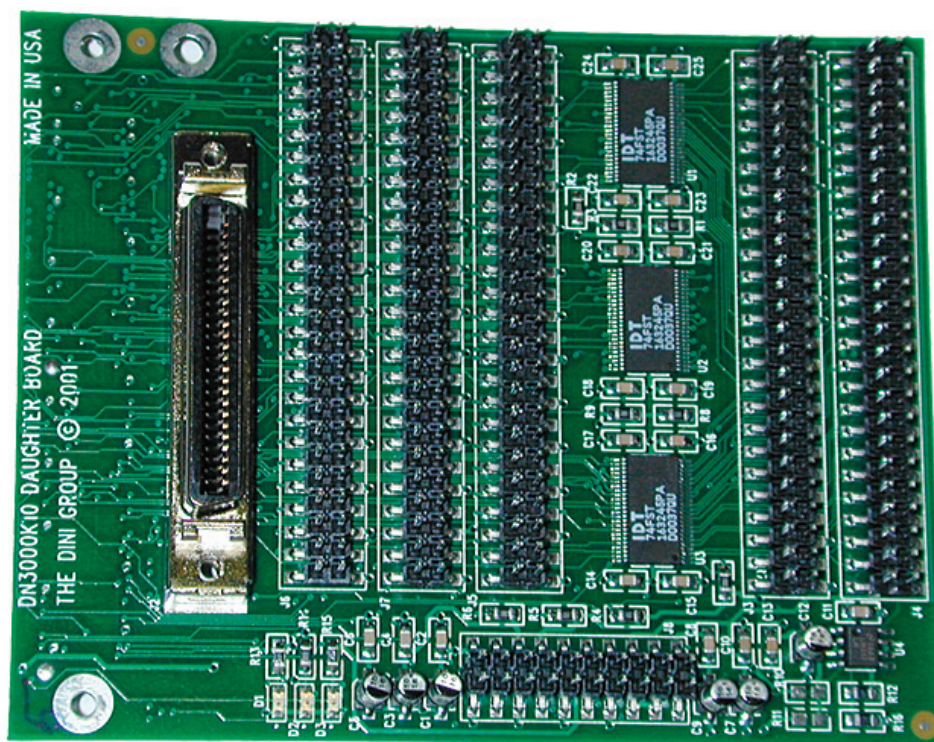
shows the assembly drawing of the DN3000k10SD Daughter Card.
